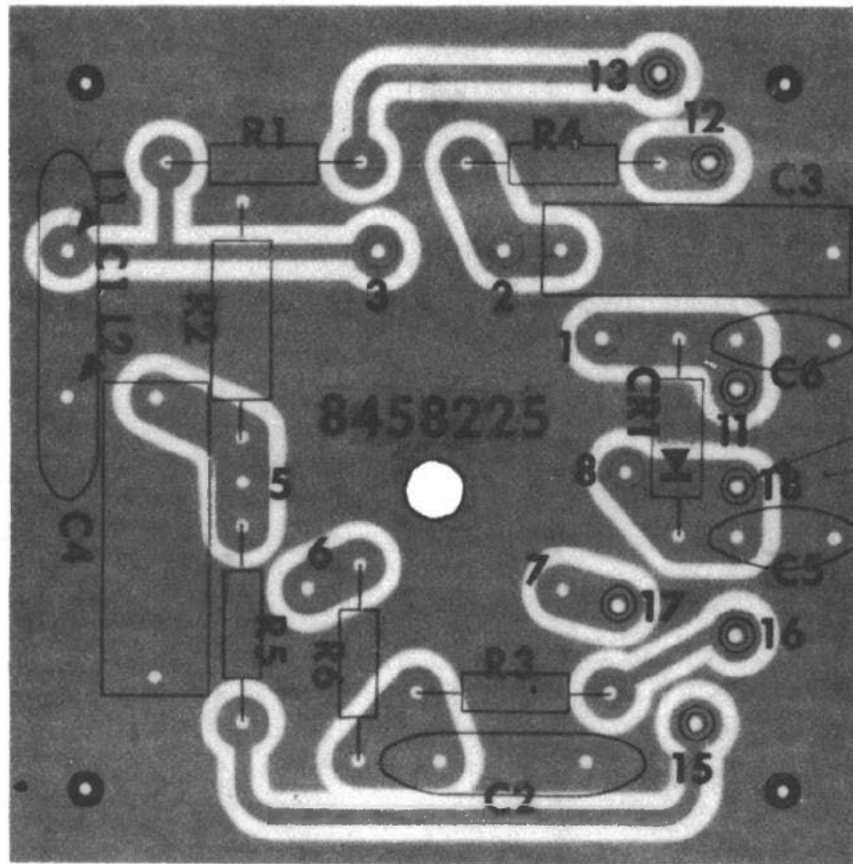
Component Locations, Filter Board Subassembly A2.
